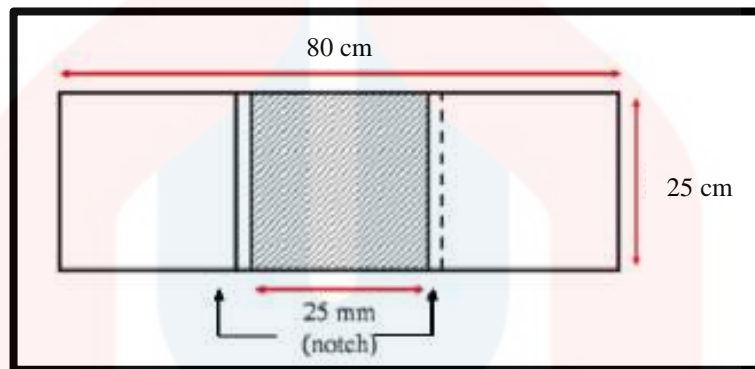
Notch cutting on tensile shear test piece (Liew & Grace, 2016)
